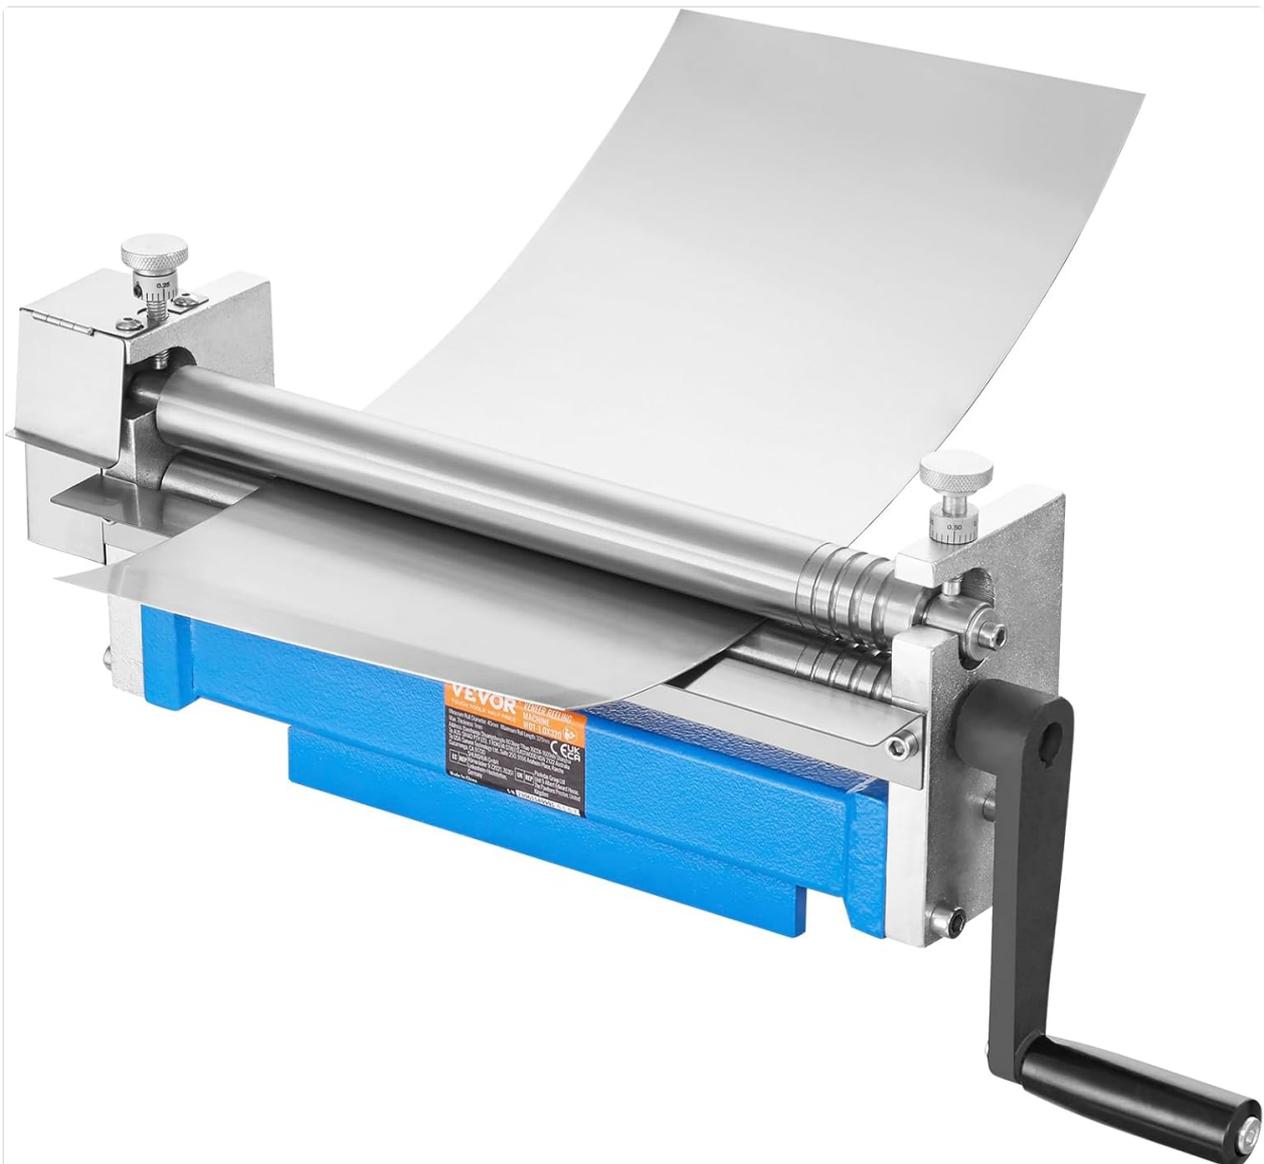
Main view of the VEVOR Slip Roll Machine.
